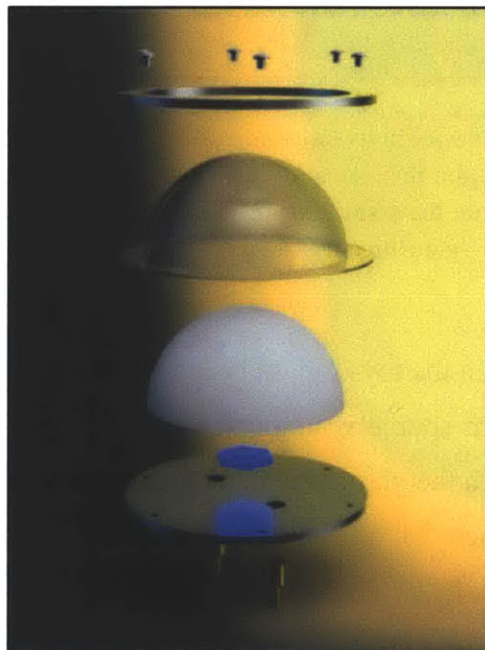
An exploded view of the prototype desktop toy shows the silicone bladder, glass media, light source, air valve, and fill port.
